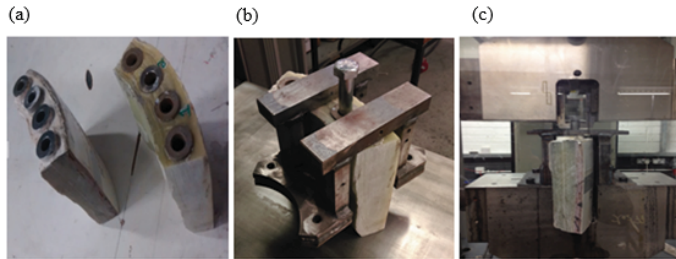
(a) Left: Drilled and bonded inserts from original blade, Right ÉireComposites embedded inserts (b) test fixture used to test insert pull-out strength (c) Test fixture and inserts installed in 250kN test machine.
